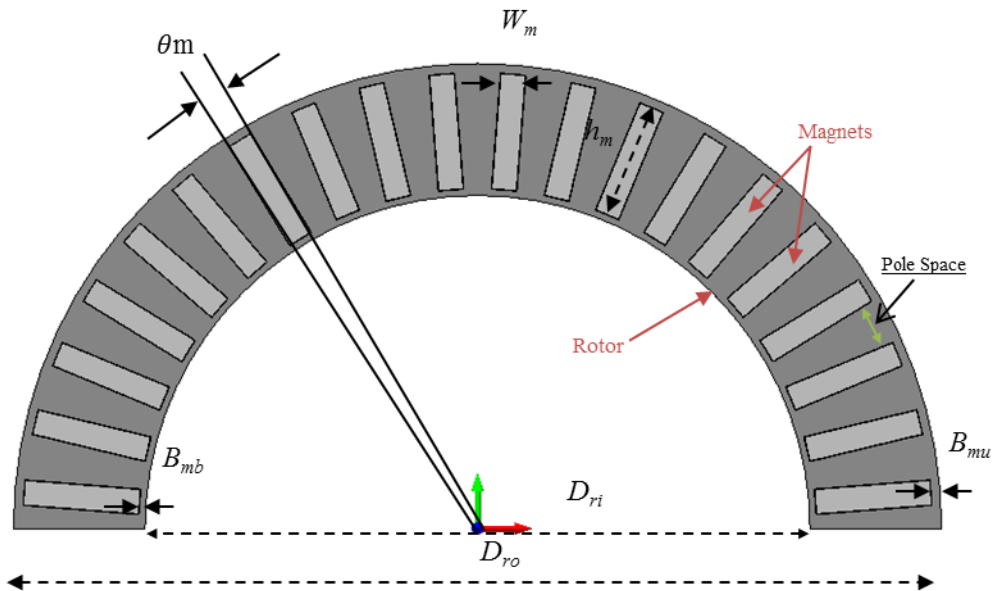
Rotor and Magnet Dimensions of the STPM Machine with Concentrated Magnets.
